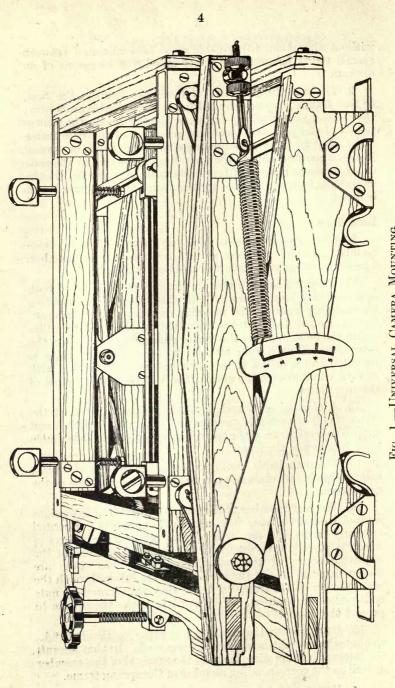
UNIVERSAL CAMERA MOUNTING.
